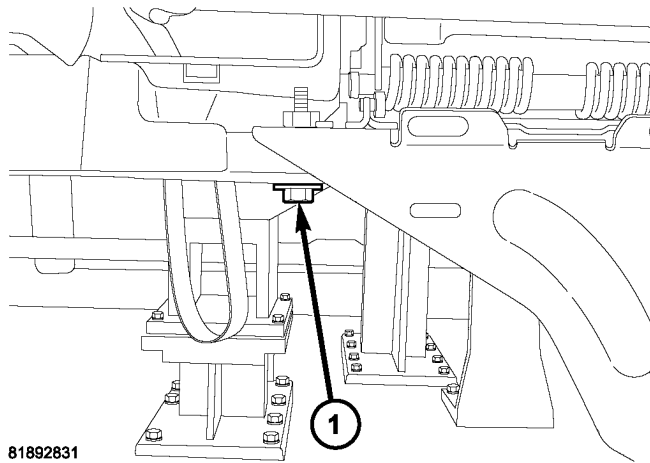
UNDERSIDE TUMBLE MECHANISM BOLT
